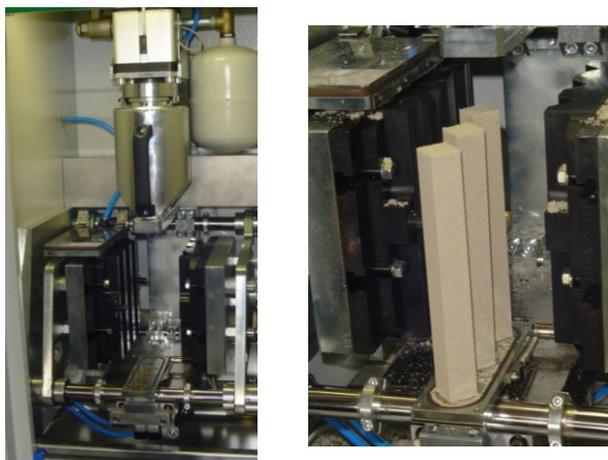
View of the LUT/c/CO₂/A blower stand and core samples
